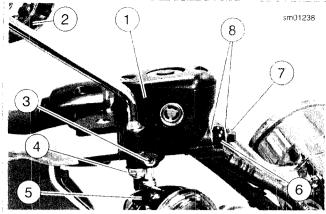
Verifying Front Brake Master Cylinder Bore Size (single disc master cylinder)
